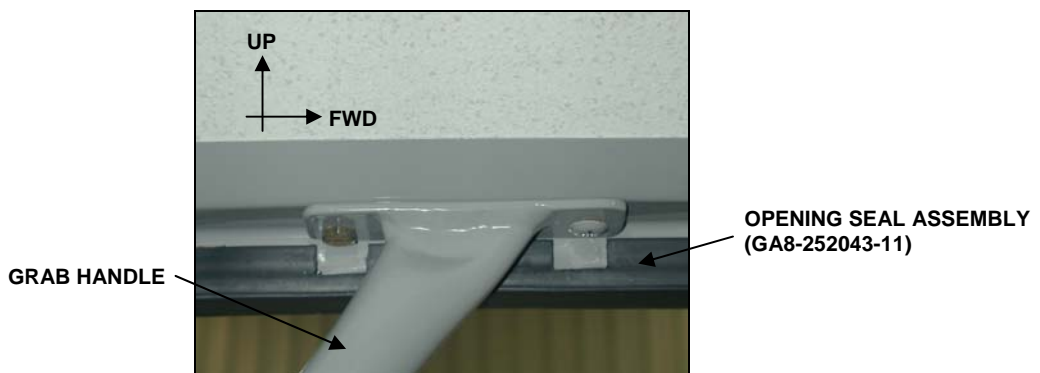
Trimming of the opening seal attach flange around the grab handle fasteners.
